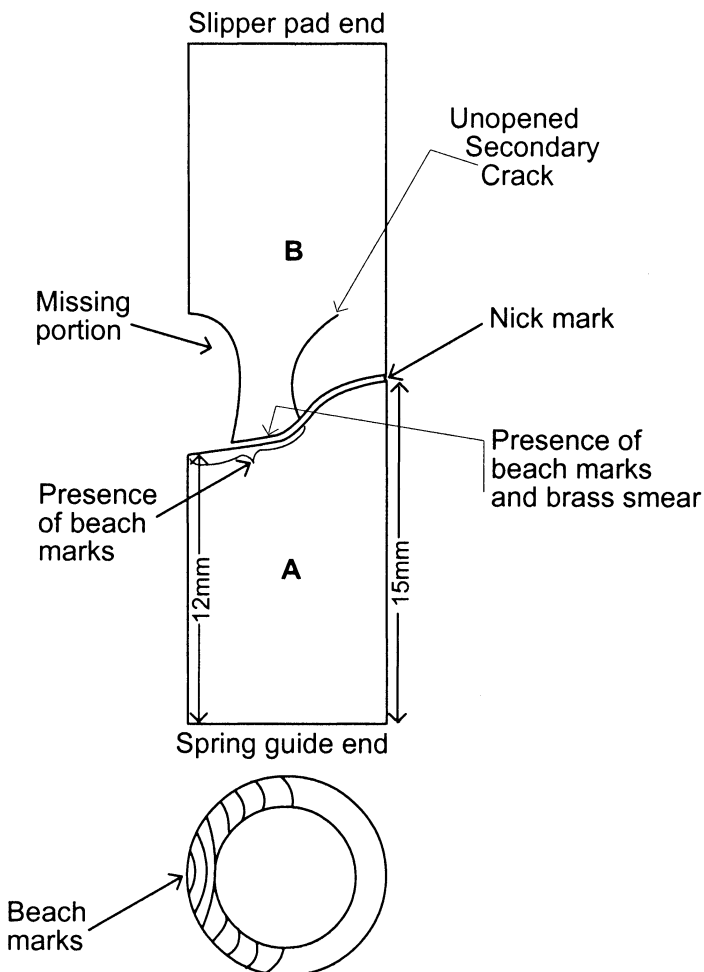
Sketch showing the fracture pattern of the failed piston
